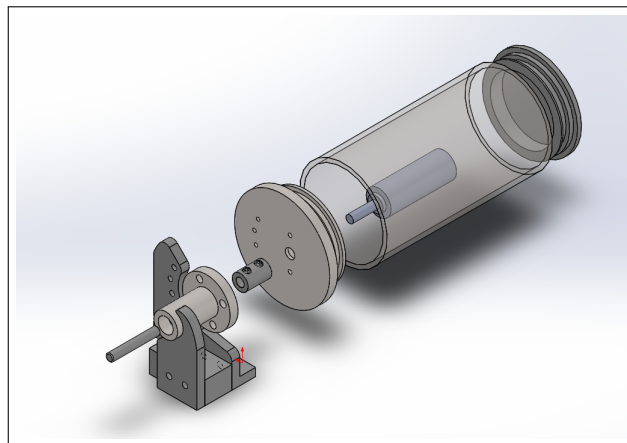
Exploded view showing the waterproof housing with the motor, shaft extension coupler, grease packed shaft seal mount, o-ring sealed end caps and the housing mount
